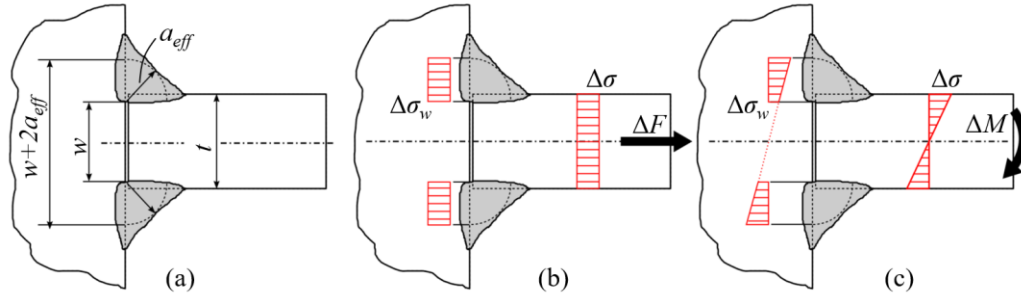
(a) Dimensions of LC joints, and weld stresses for (b) axially and (c) bending loaded specimens in terms of the nominal stress system.
